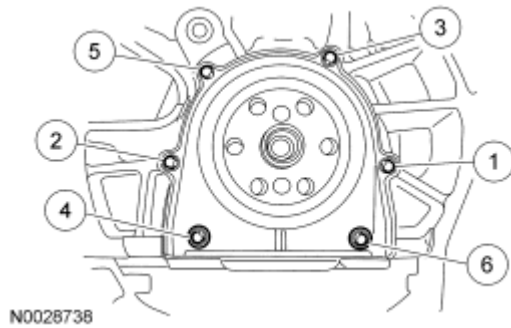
Identifying Tightening Sequence Of Crankshaft Rear Oil Seal Bolts
